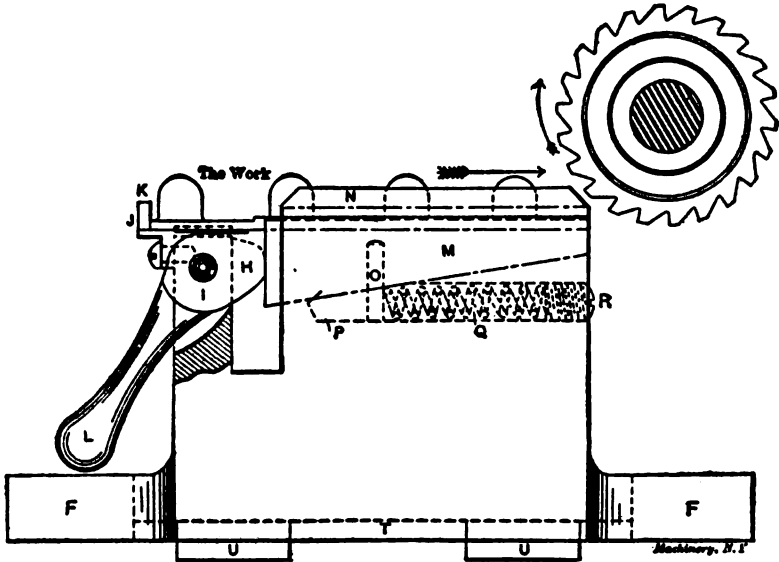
End View of Fixture, Fig. 63, with Work in Position
